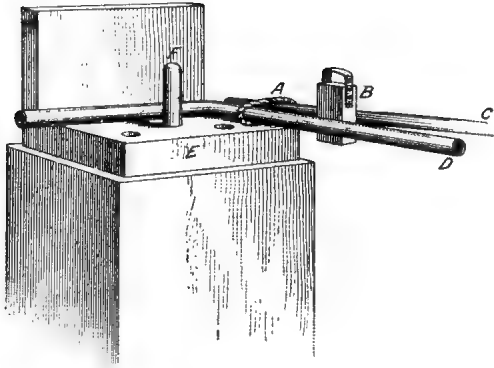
Bending Block Arranged for Use with Back Plate and Center Pin.
